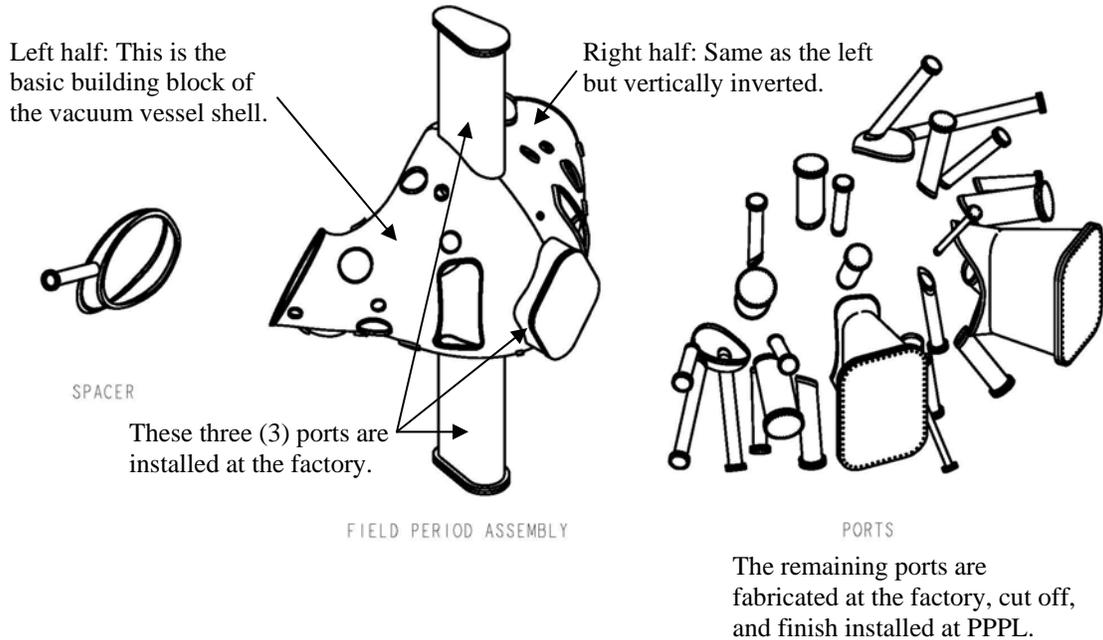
Vacuum Vessel Sub-Assembly (VVSA) Components
